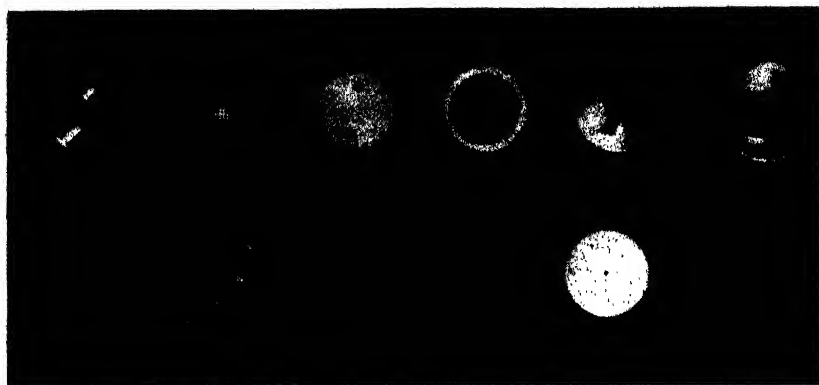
Integral parts of the spray nozzle used showing assembled nozzle and the alternate cone-spray disk.
